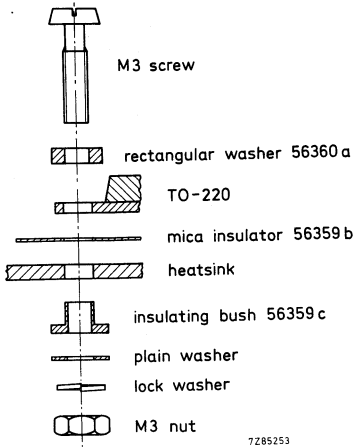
Insulated screw mounting with rectangular washer. Known as a "bottom mounting".
